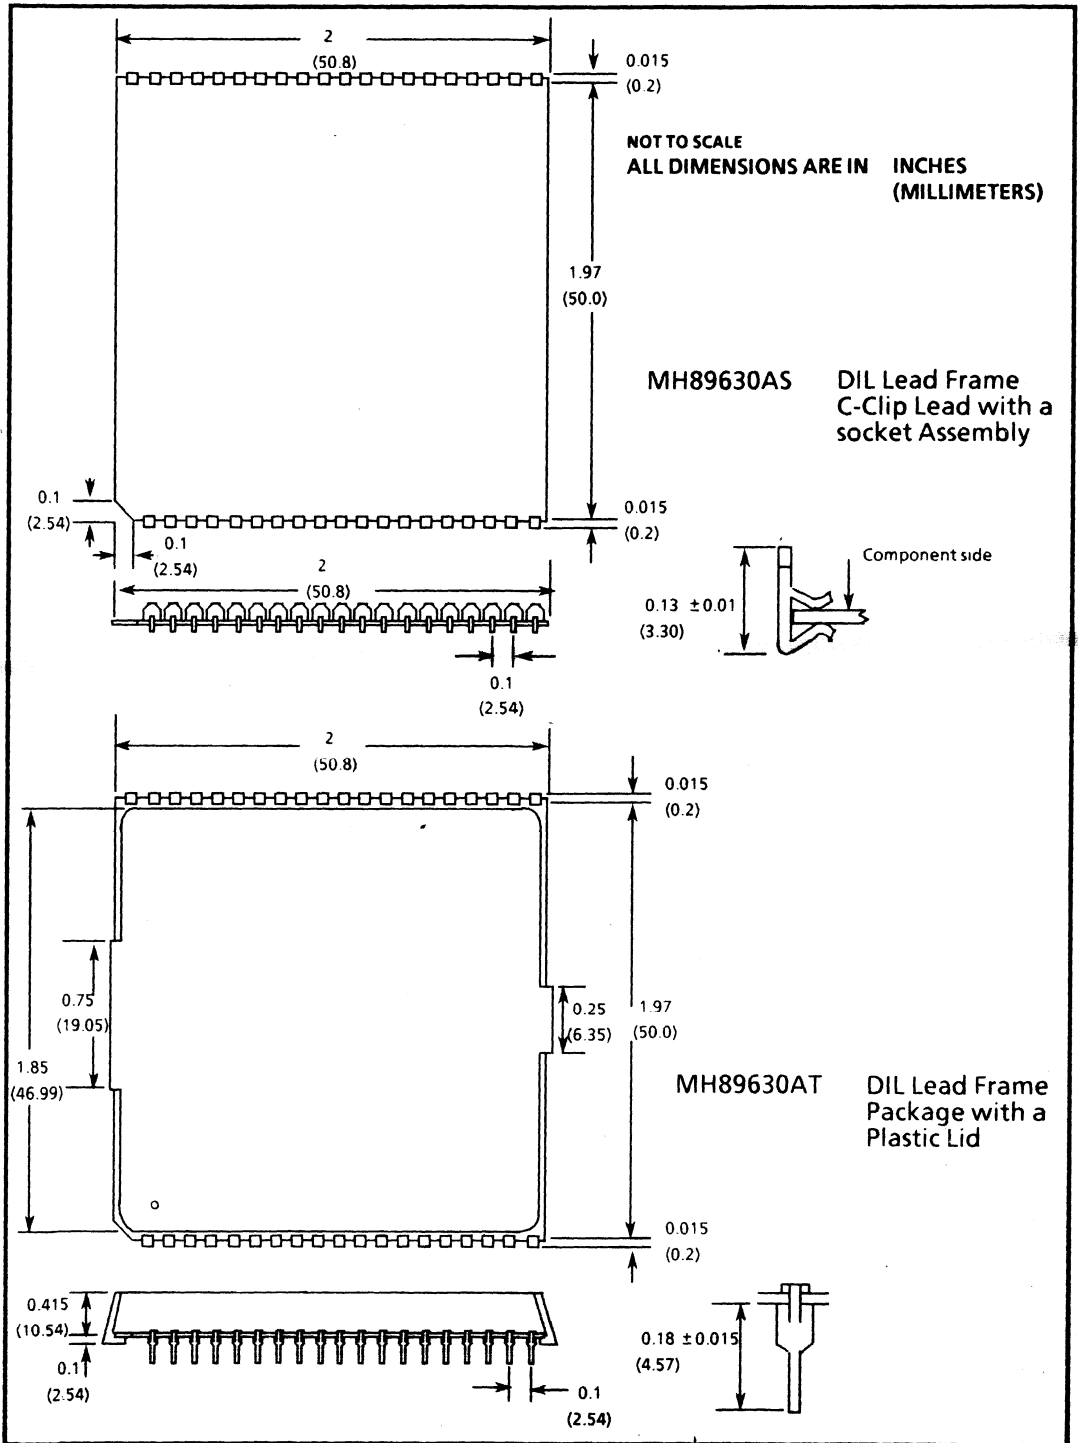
Physical Dimensions of 40 Pin Dual In Line Hybrid Package
